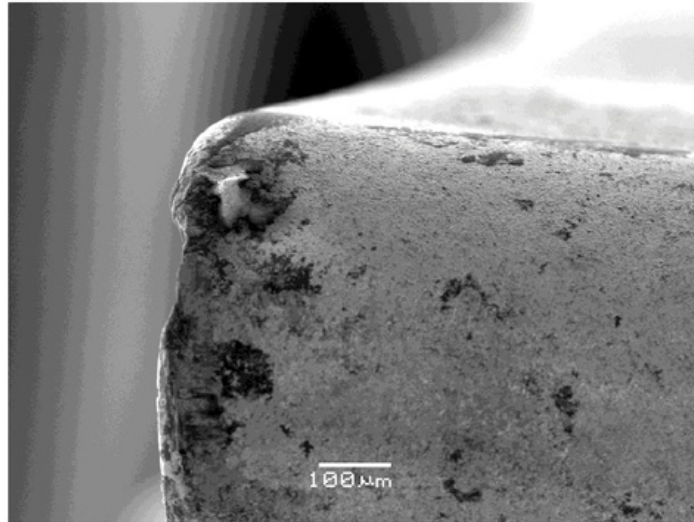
TNGG cutting tool after Average machining 3D printed Ti-64.
